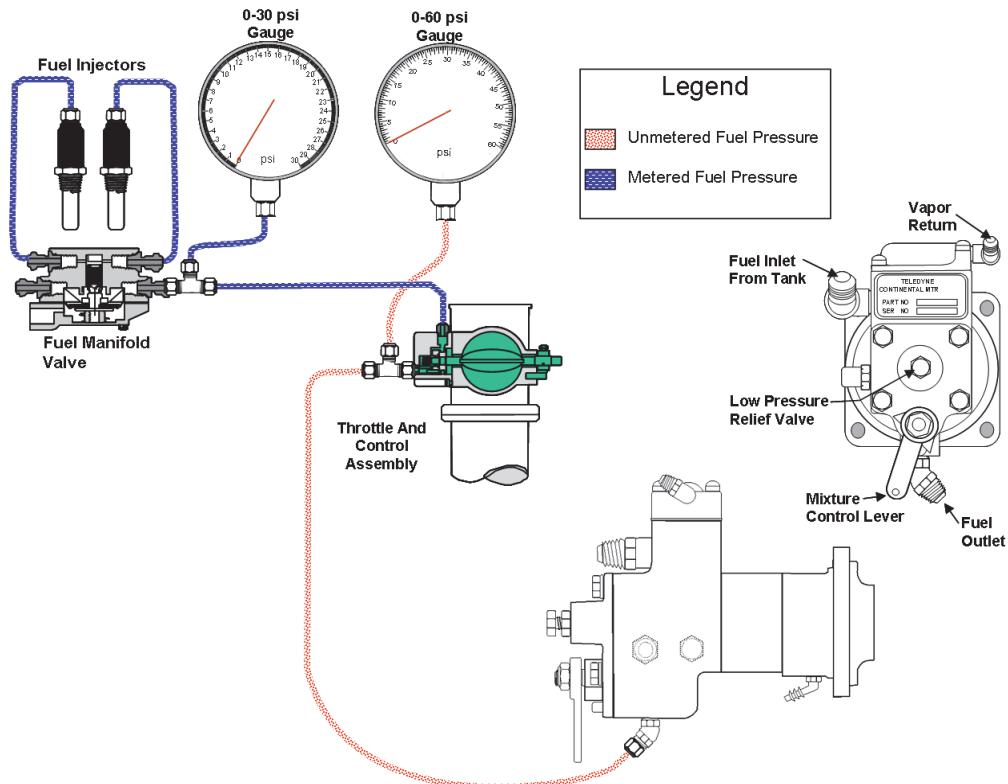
Calibrated Gauge Connections to Integral Throttle Body/Metering Unit
